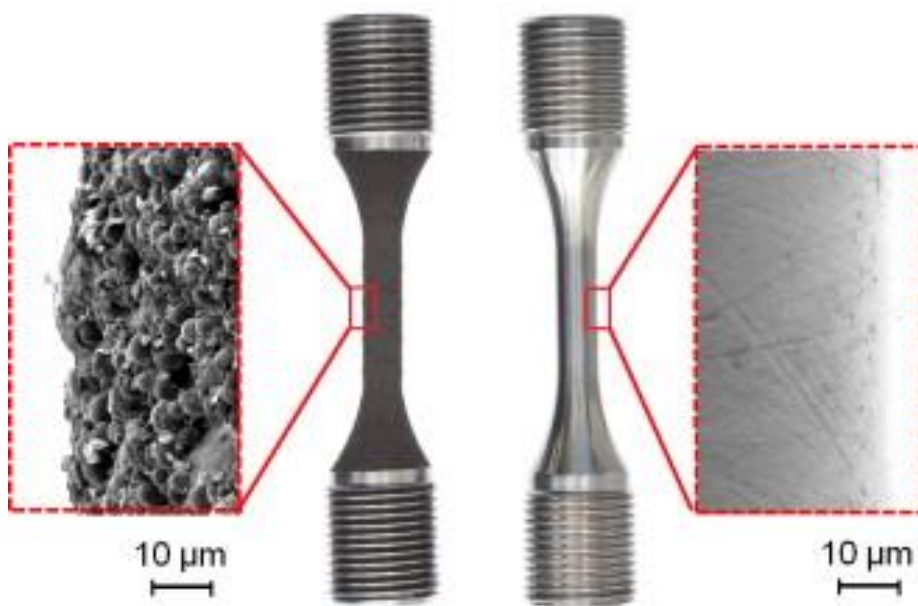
EBM surface finish for as-built (on the left) and (right) machined specimens.
